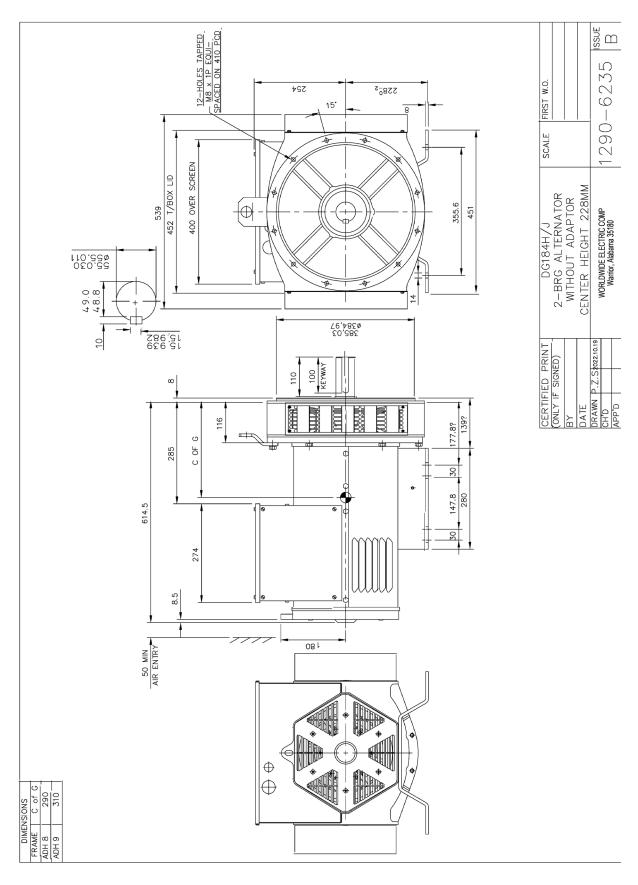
10 & AHD 5 - 7 Double Bearing
